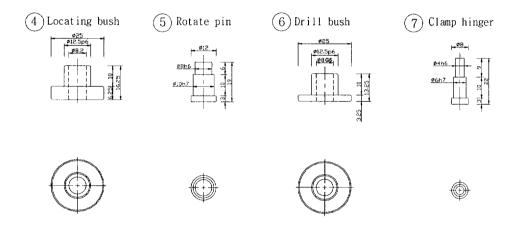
(c) Drawing of locating bush, rotate pin, drill bush and clamp hinge among jig component.
